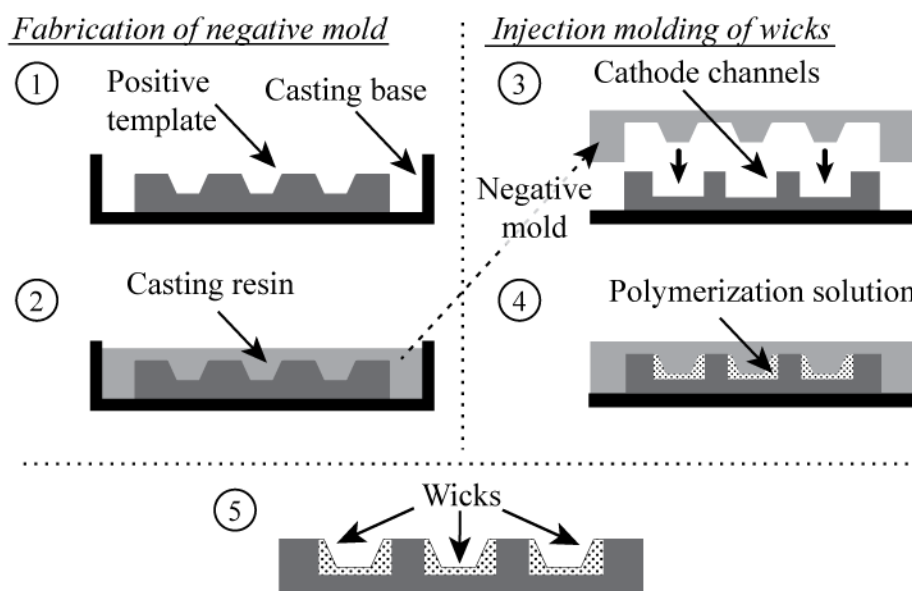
Schematics of procedure for *in situ* wick fabrication. *Fabrication of negative mold*: (1) We placed an aluminum positive template into an acrylic casting base designed to hold the casting resin. This template formed one surface of the resulting wicks by defining a negative image in the resin mold, and the part of interest here (the fuel cell cathode channels) defined the opposite surface. (2) We poured a solvent-resistant polyester resin over the aluminum positive template and allowed to cure for one week. Aluminum template was then removed. *Injection molding of wicks*: (3) We sandwiched the fuel cell cathode channels between the resin negative mold and a back support plate and compressed. (4) We then injected polymerization solution to fill remaining void space (injection ports not shown and wick layer thickness exaggerated for clarity), sealed the mold assembly, and then irradiated with UV for 1 h. *Removal and cleaning*: (5) Aluminum cathode channel plate, with attached wicks, was then removed and soaked in an MeOH bath for 24 h. Sample was then dried.
